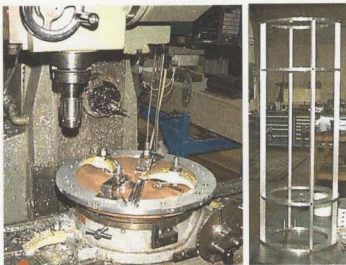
View of flanged module rings. The notches are for longitudinal stringer attachment, the two sets of two holes at the top and bottom are for instrument mounting, and the four remaining holes are to attach modules to one another.
